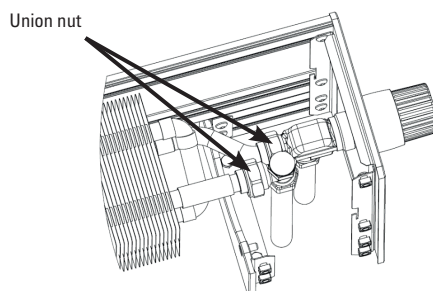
Close-up view of the connection between the valves and the heat exchanger (the heat exchanger design differs according to the model).
